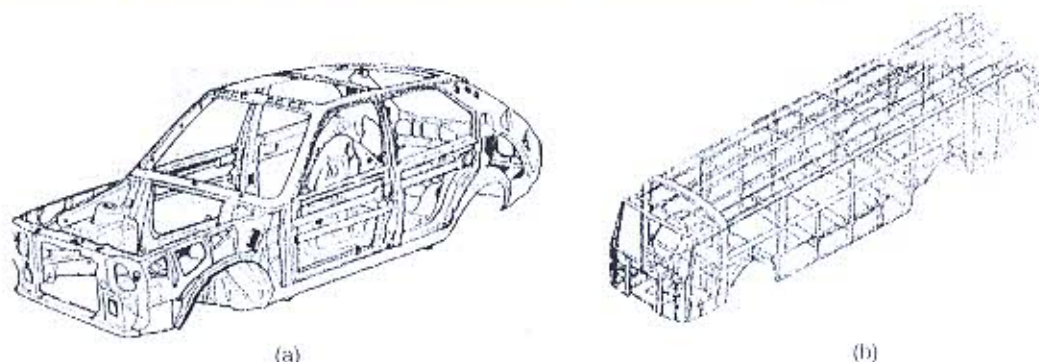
Unitized body designs: (a) passenger car and (b) bus
